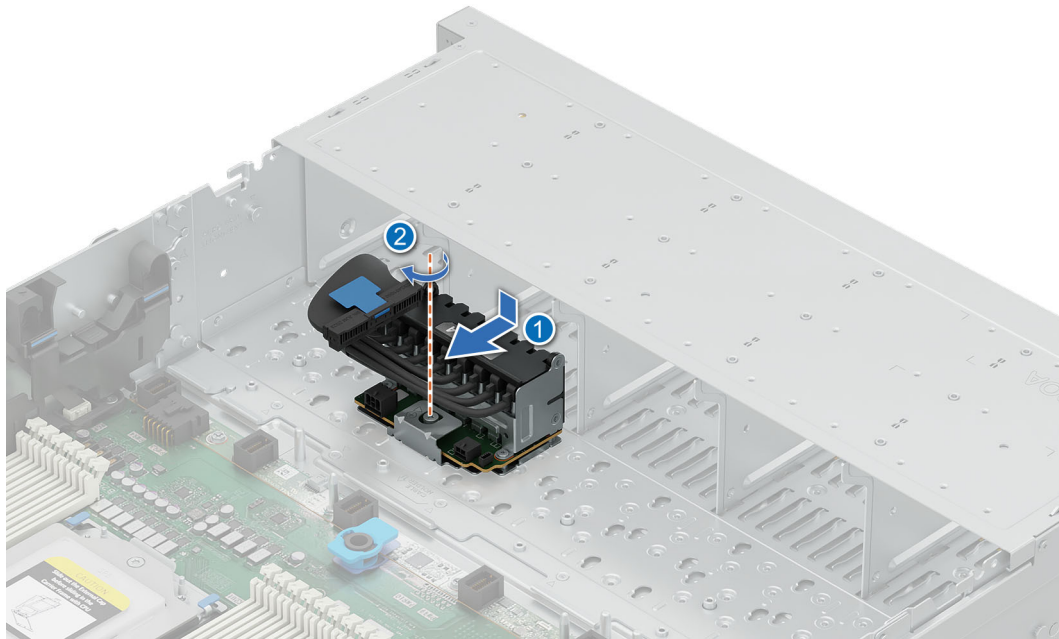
Installing the EDSFF Gen5 E3.S NVMe direct drive backplane module.
